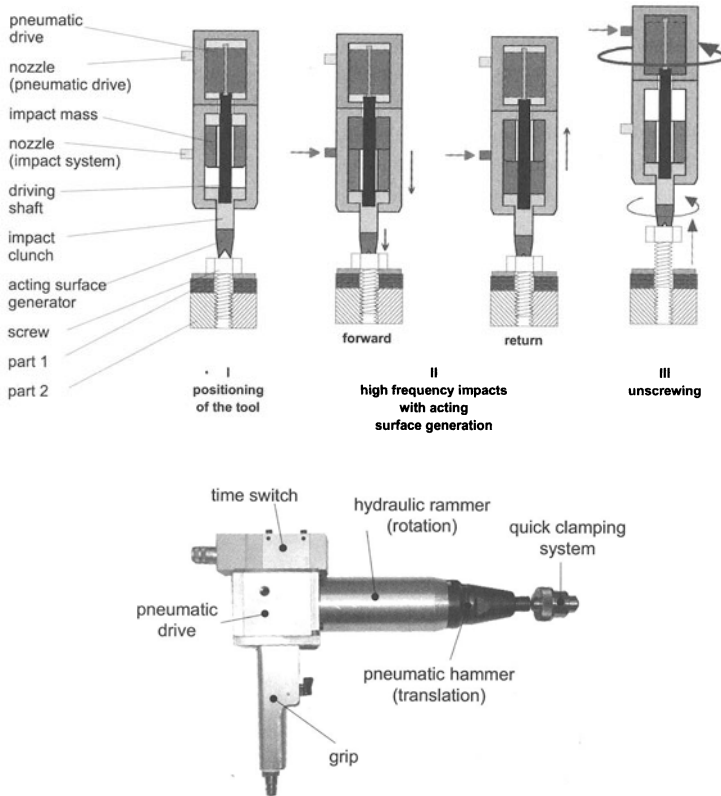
Special disassembly tool for fast unscrewing [25, 26]
